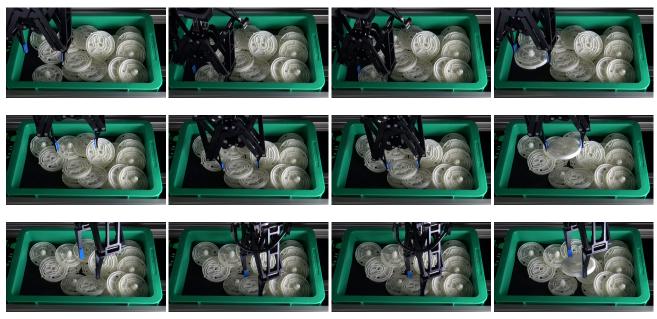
Bin picking experiments of disk-shaped industrial parts with the developed gripper.
